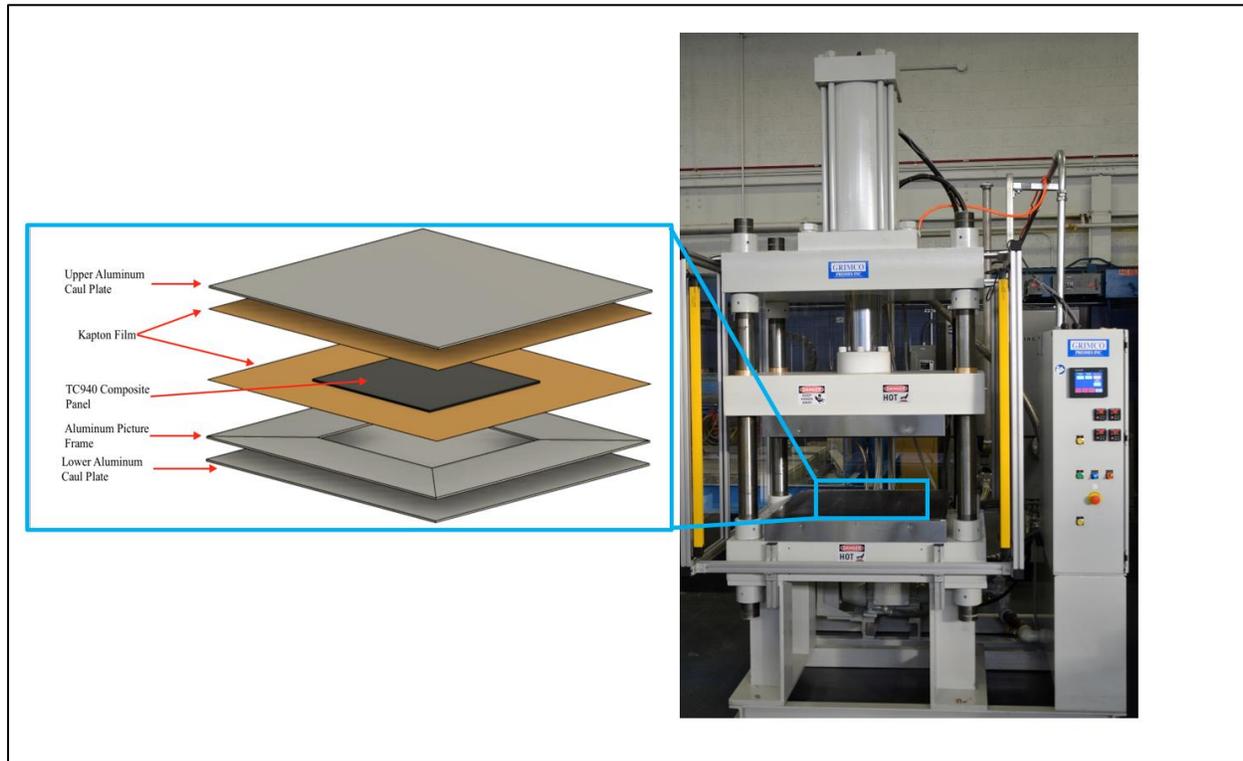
Depiction of tool used to manufacture the thermoplastic composite within a heated hydraulic press
